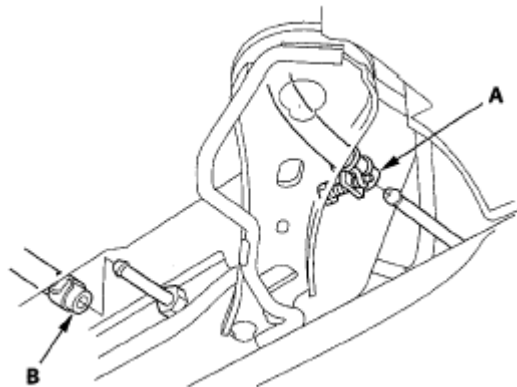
Identifying Power Steering Fluid Hose And ATF Cooler Hose
